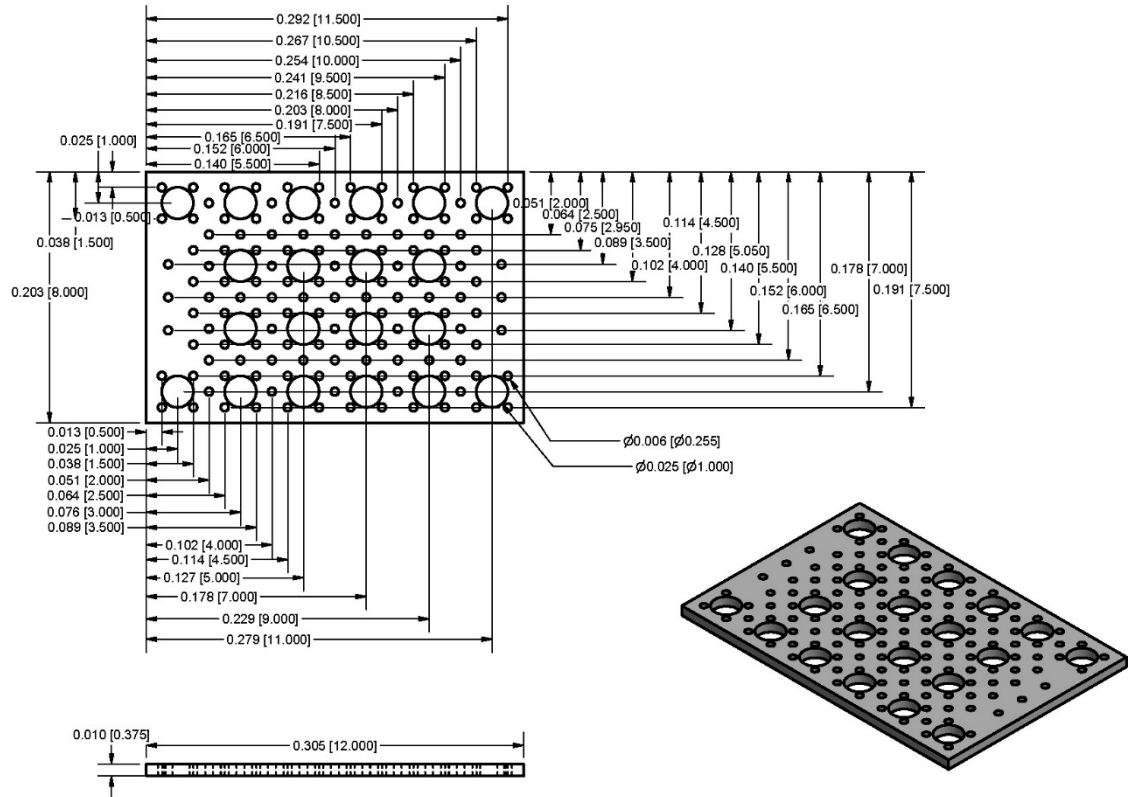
Multipurpose mount to integrate different sensors and instruments.
